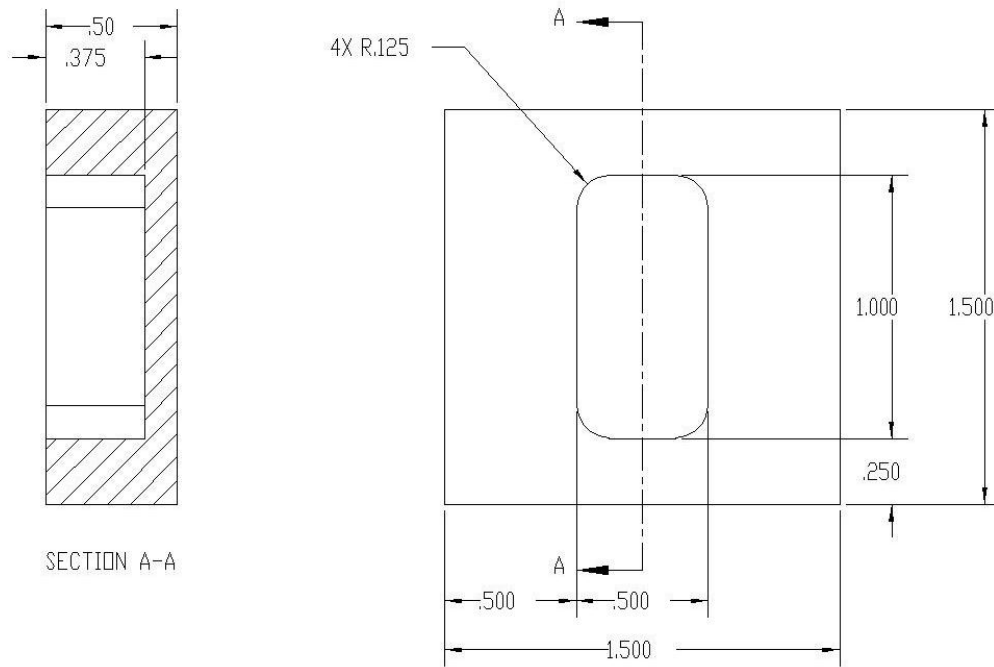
Example of a drawing that will be considerably easier and much less costly to machine than the one shown in Figure 12. This is because the internal corners have a radius, so they will be much easier to machine.
